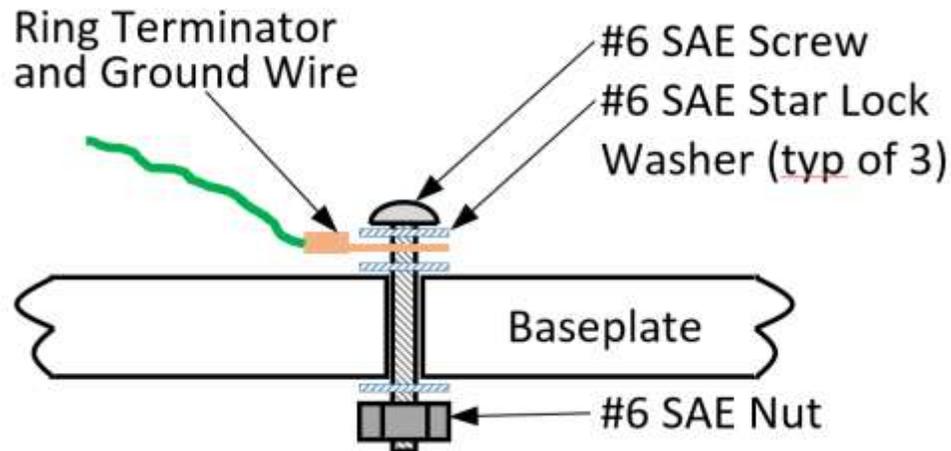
Self Drilled Screw Assembly (Shown before final tightening of nut and screw)
